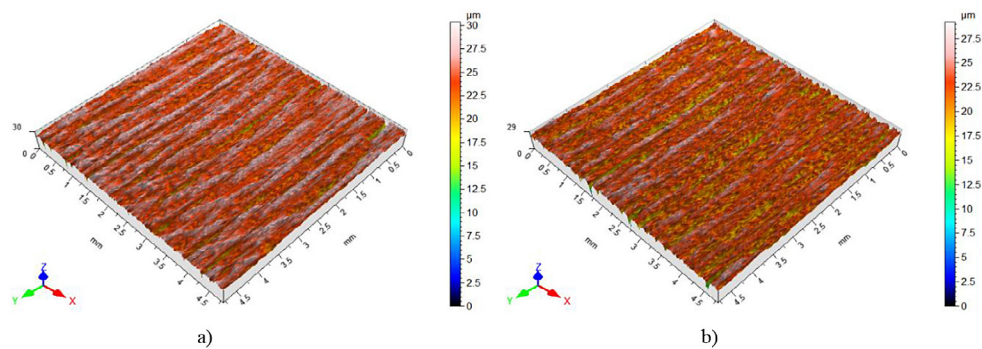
3D topography maps for the smallest 0.05 mm/tooth (a) and largest 0.60 mm/tooth (b) feed per tooth after milling the side surface of CFRP
